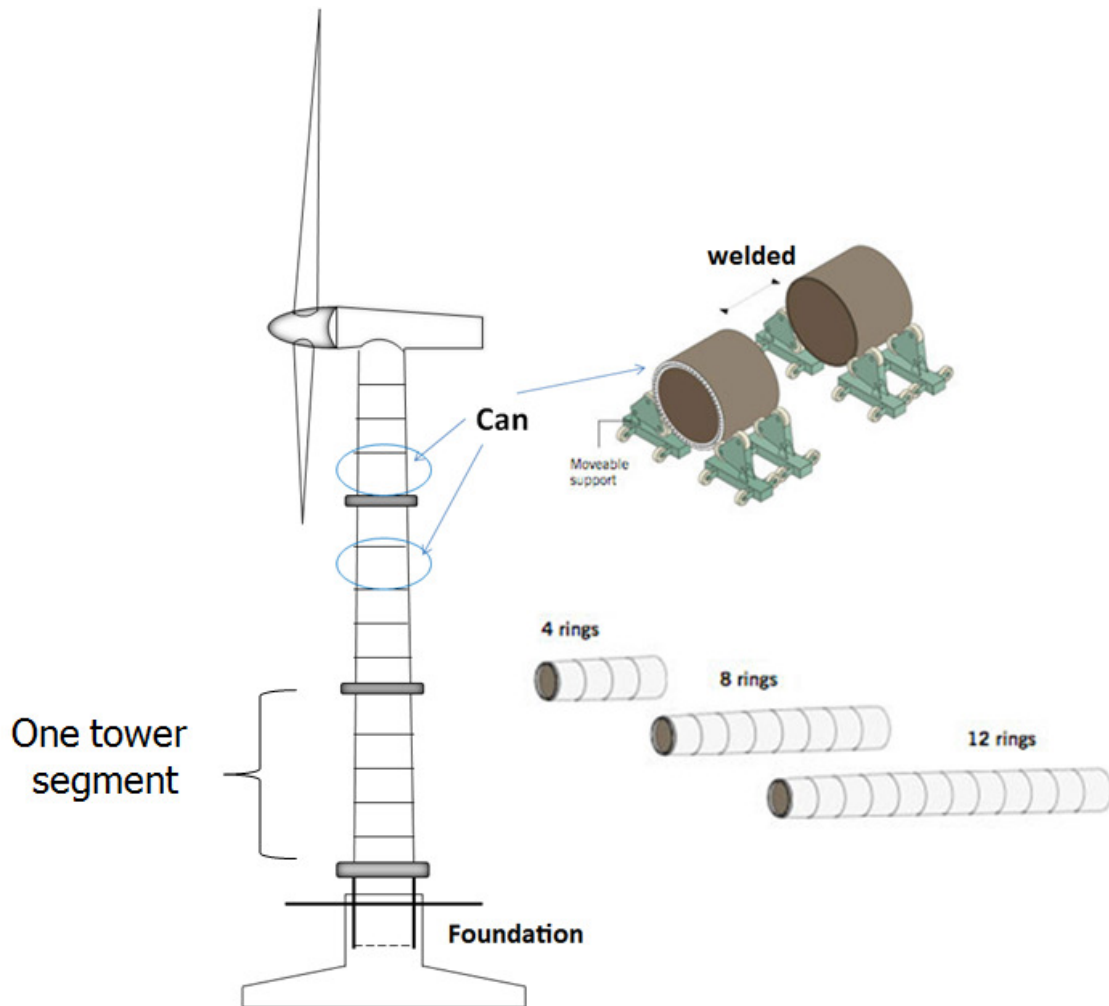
Construction of a tubular steel tower from welded cans [13] → flanged tower segment → complete tower
